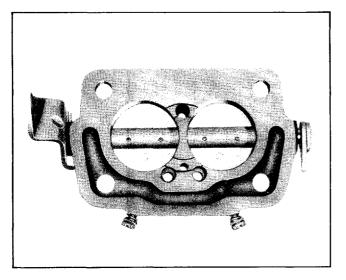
B-23 Correct Installation of Throttle Valves-Carter
